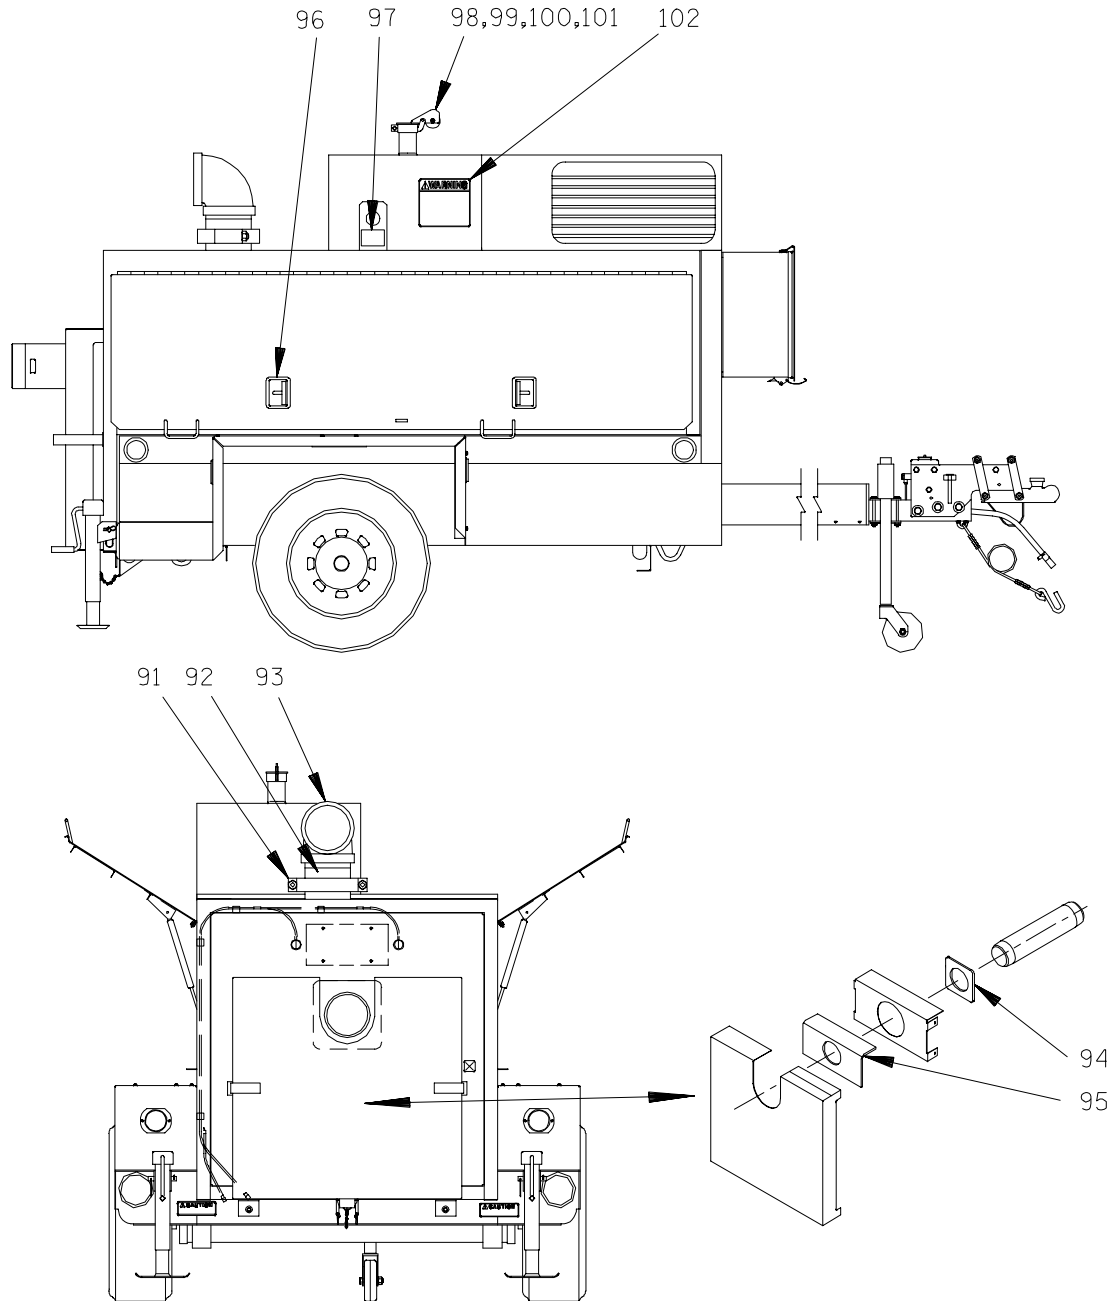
T6A3-F4L-SPA Pump Assembly (Cont'd)
